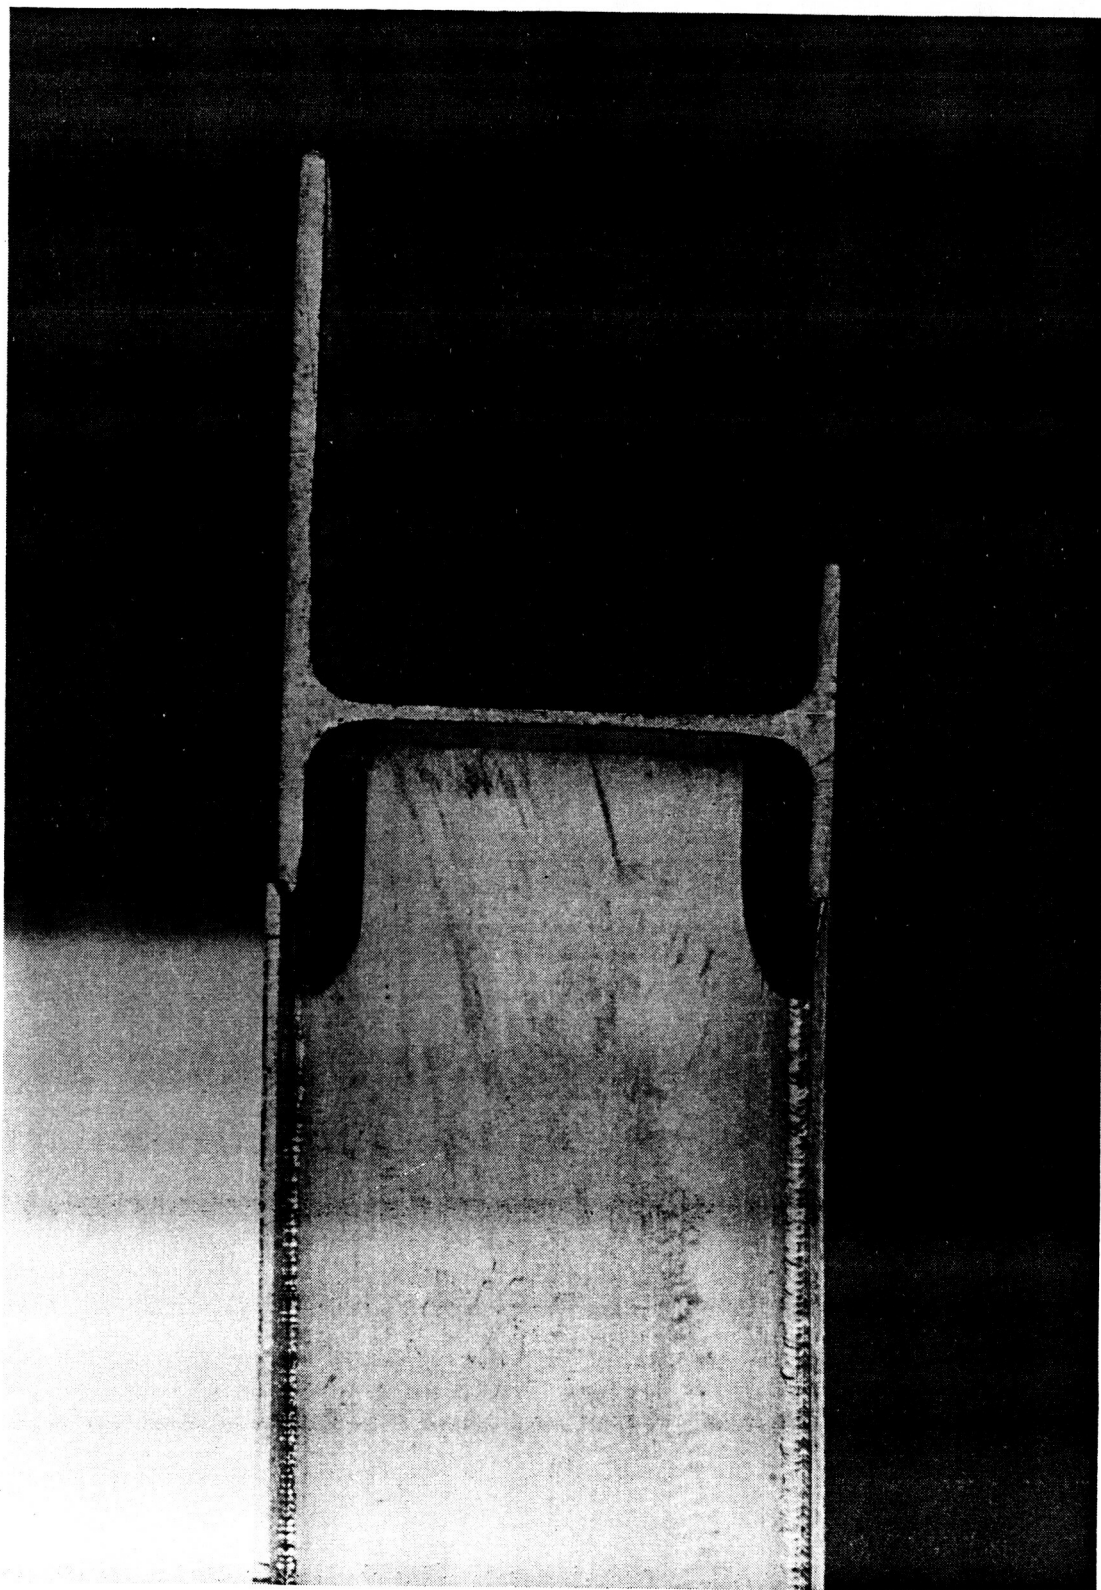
Detail of Closure Welds — Welded Panel to Beam — Ready for Welding.
